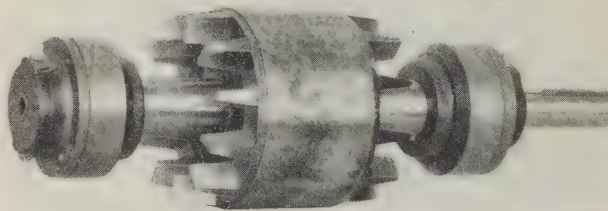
INDUCTION MOTOR ROTOR SHOWING CARTRIDGE TYPE BALL-BEARING HOUSINGS
